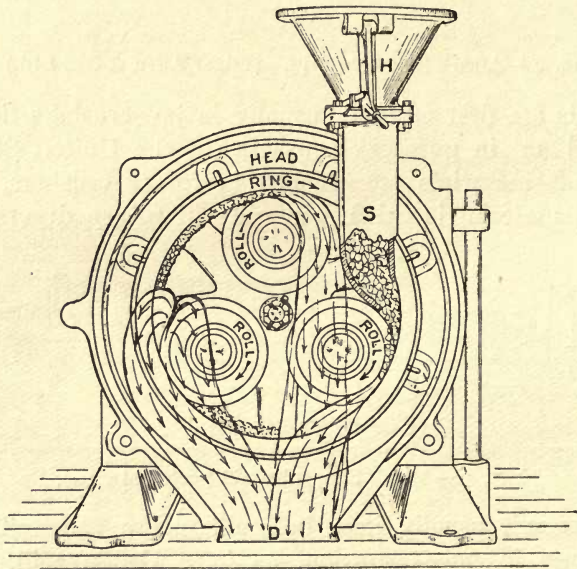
Sturtevant "open-door" ring roll-mill.
